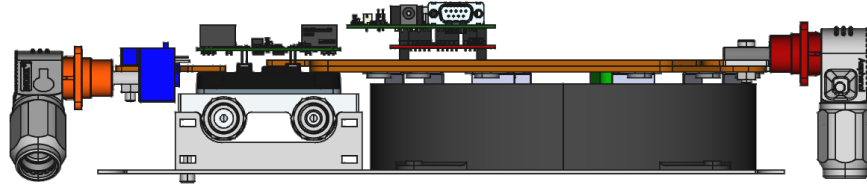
Side View Render of the Final Inverter Assembly with the Enclosure Hidden
